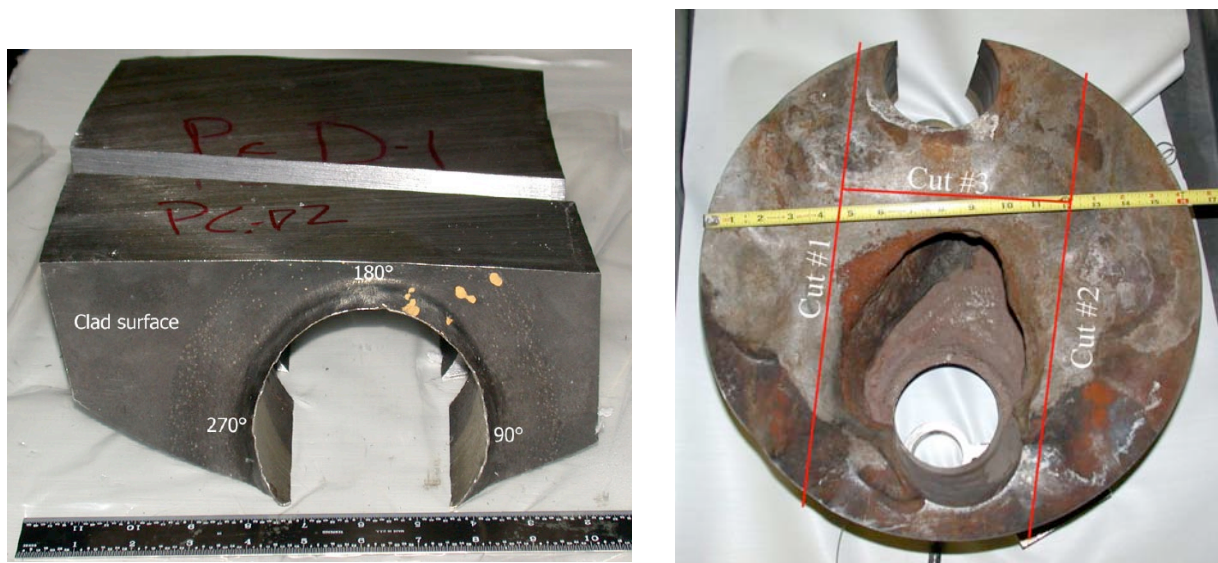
Photographs of (a) the ring from Davis-Besse CRDM Nozzle #3 and (b) reactor pressure vessel head sample with J-groove weld from Nozzle #11 (piece D2).
